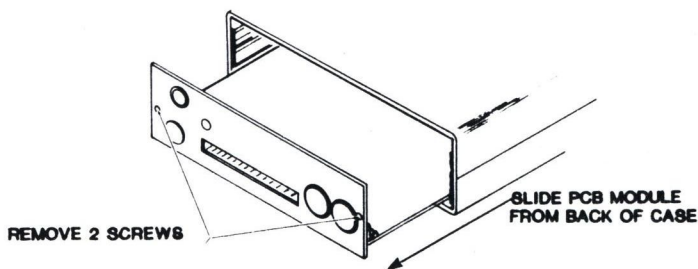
REMOVING PCB MODULE FROM CASE
